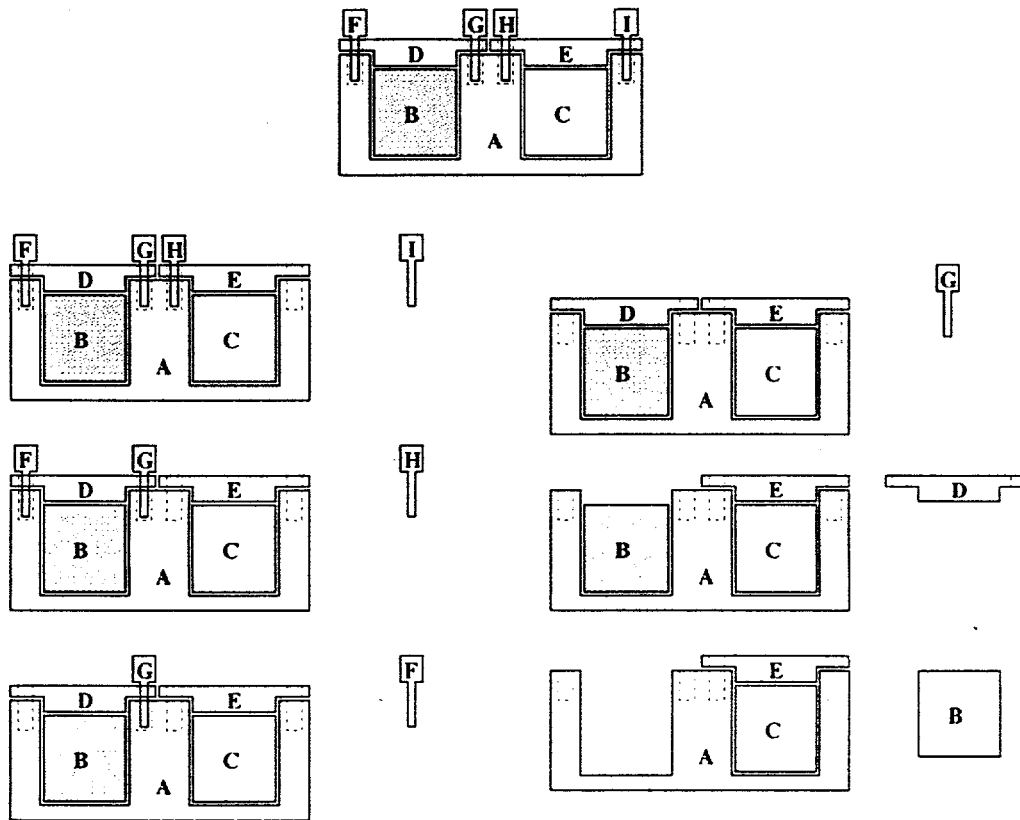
Example of an assembly from which we wish to remove a specific part, B: the initial plan removes parts H and I unnecessarily.
